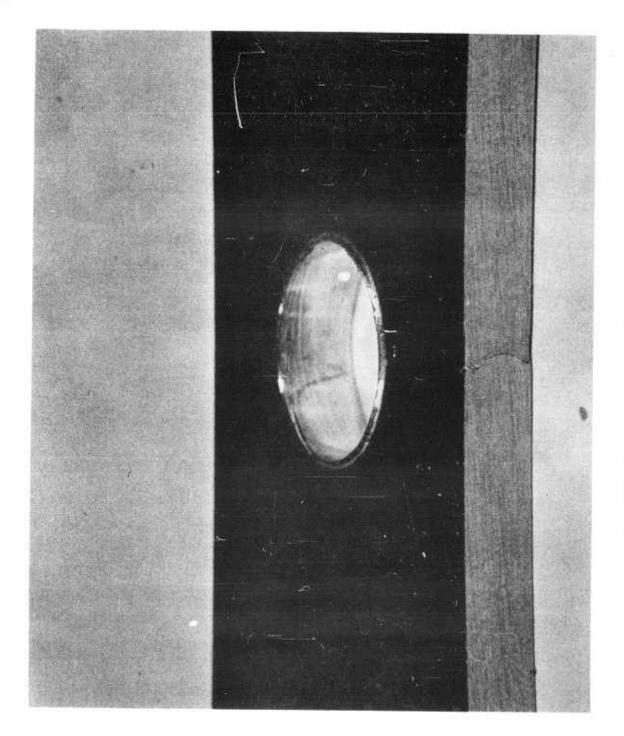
Typical Hole with Burr Titanium Fatigue Specimen
